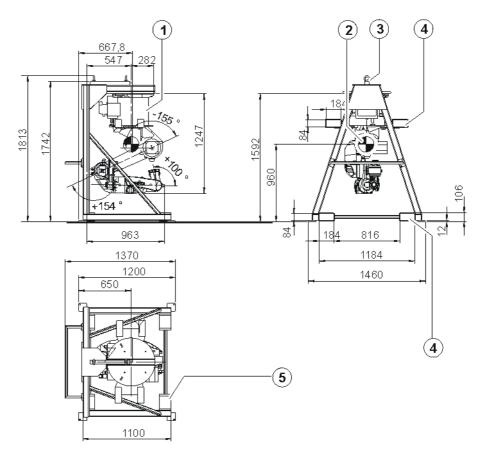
Transport dimensions, ceiling-mounted robot KR 16 arc HW
